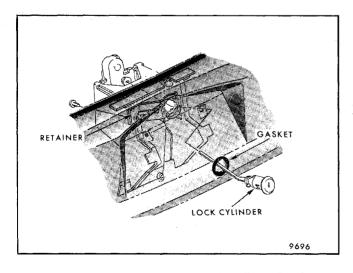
Typical Side Loading Lock Cylinder Retainer
